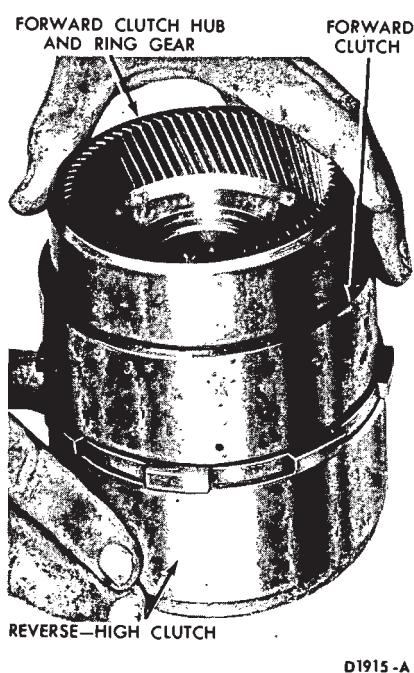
Installing Forward Clutch Hub and Ring Gear
